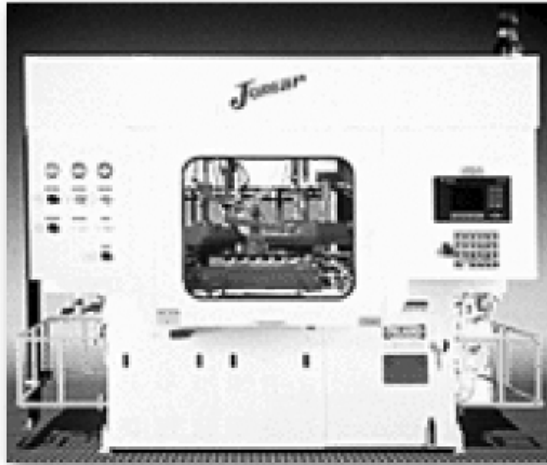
Injection blow molding machine. (Courtesy of Jomar Corporation.)
